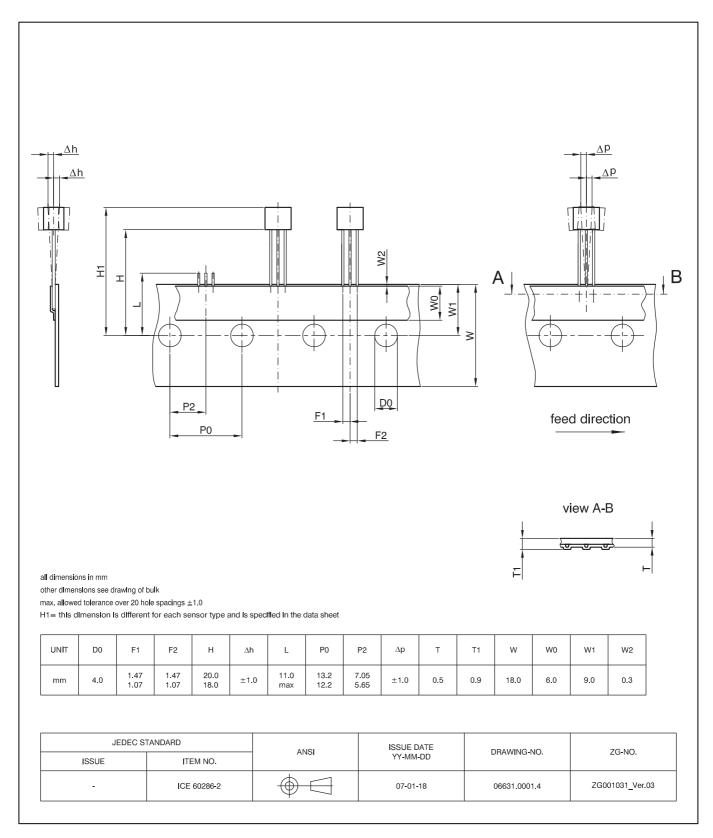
TO92UA/UT-2: Dimensions ammopack inline, not spread
